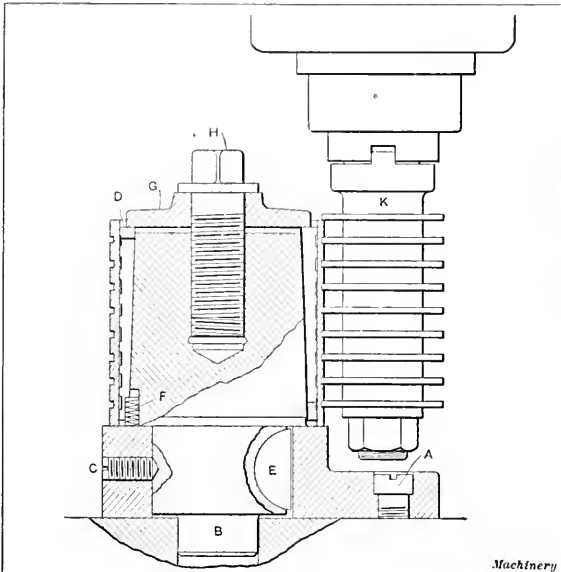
Expanding Arbor for holding Casting while Gang-sawing Packing Rings
